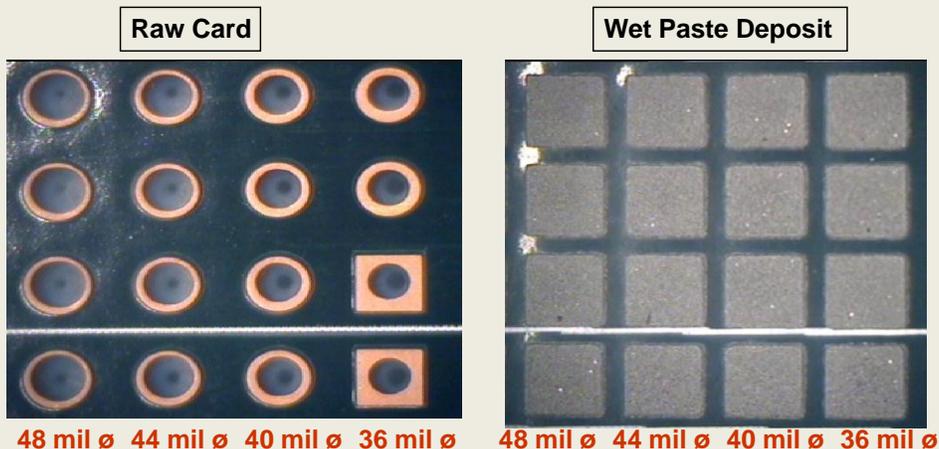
Print of 85 mil square paste bricks (100 mil pitch) for 2nd Print Stencil
